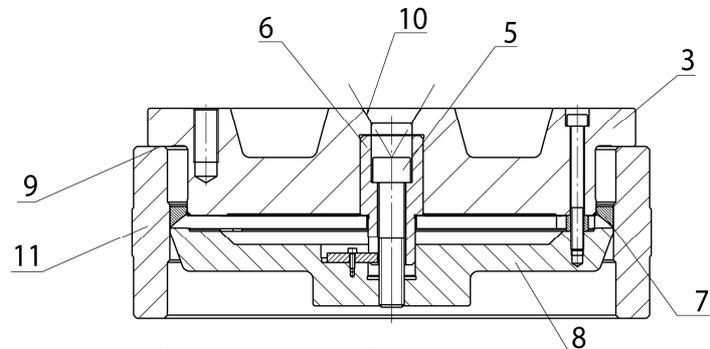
Lower centring insert Z2 for a hollow shaft as shown in Fig. 16
